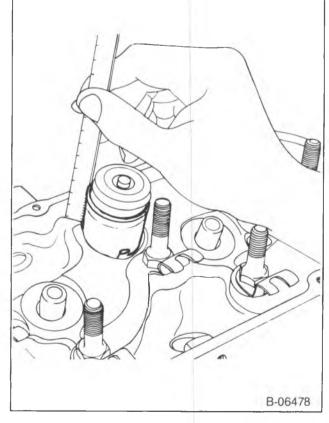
Measuring Valve Spring Installed Height (7.4L Engine Shown)
